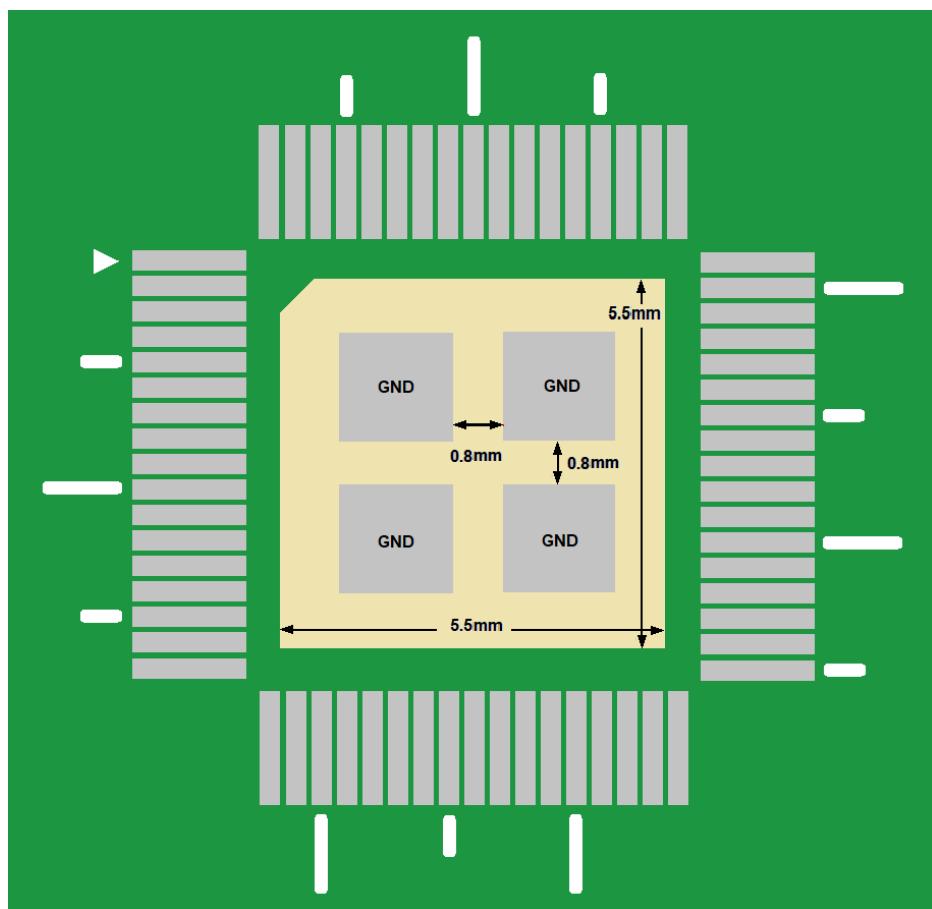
PCB Design Recommendation for the LT168B Bottom Ground Pad (2)
